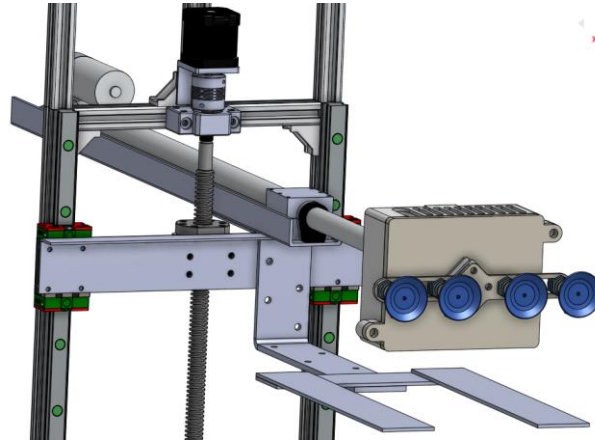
Lifting and gripping mechanism: HGR20 linear guide, SFU1605 ball screw, NEMA17 motor, Vevor linear actuator, and Festo ESG-40 suction cups
